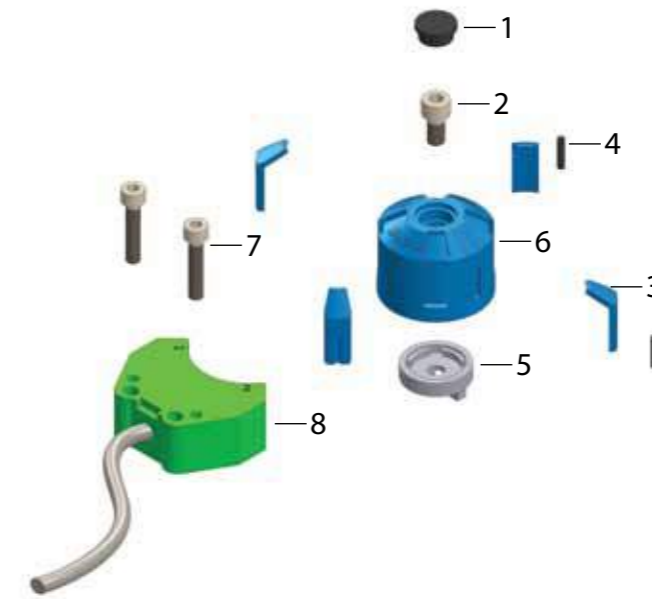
Exploded Picture of Magnetic Limit Switch Box
